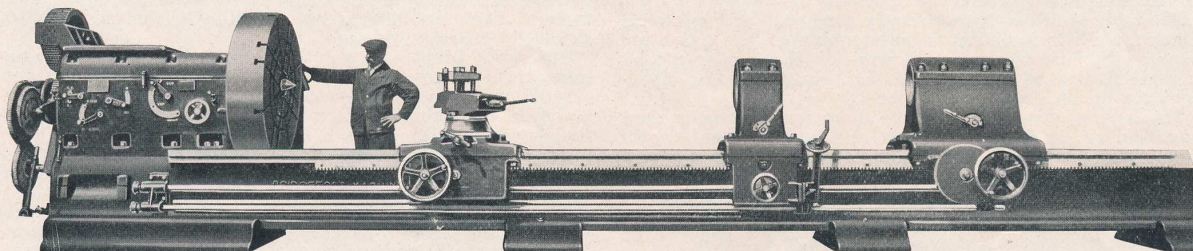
BETTS-BRIDGEFORD HEAVY DUTY GUN BORING AND TURNING LATHE, TYPE A9100
